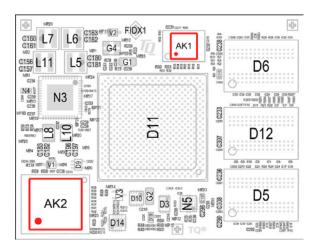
TQMa8Xx, TQMa8Xx4 dimensions, top through-view
